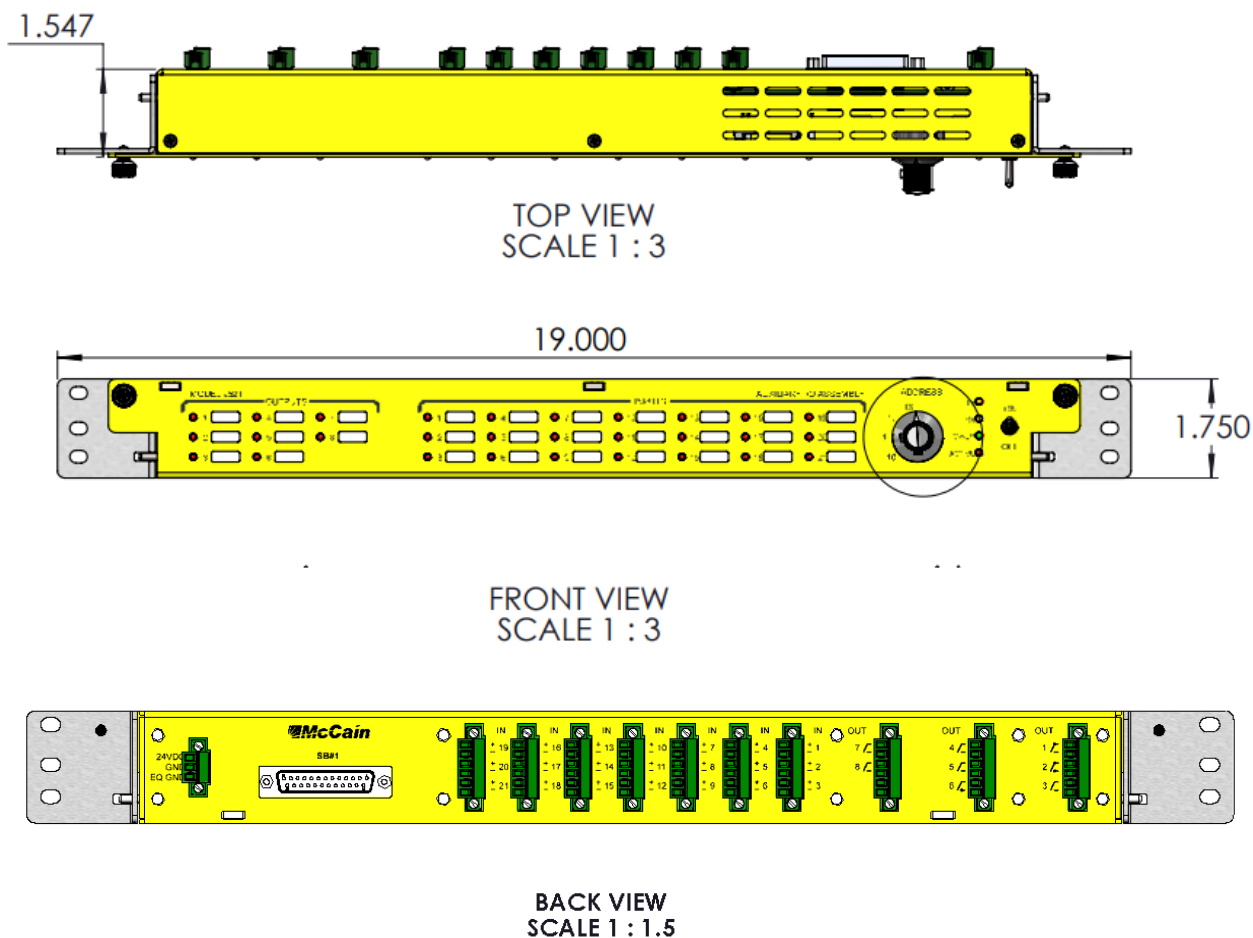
Dimensions Auxiliary I/O Assembly (All dimensions are shown in inches)
